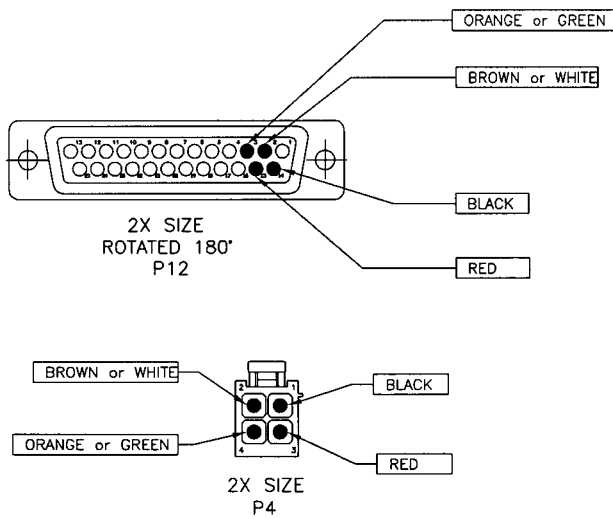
Transducer Harness Assembly (P6) Pin Out Locations
